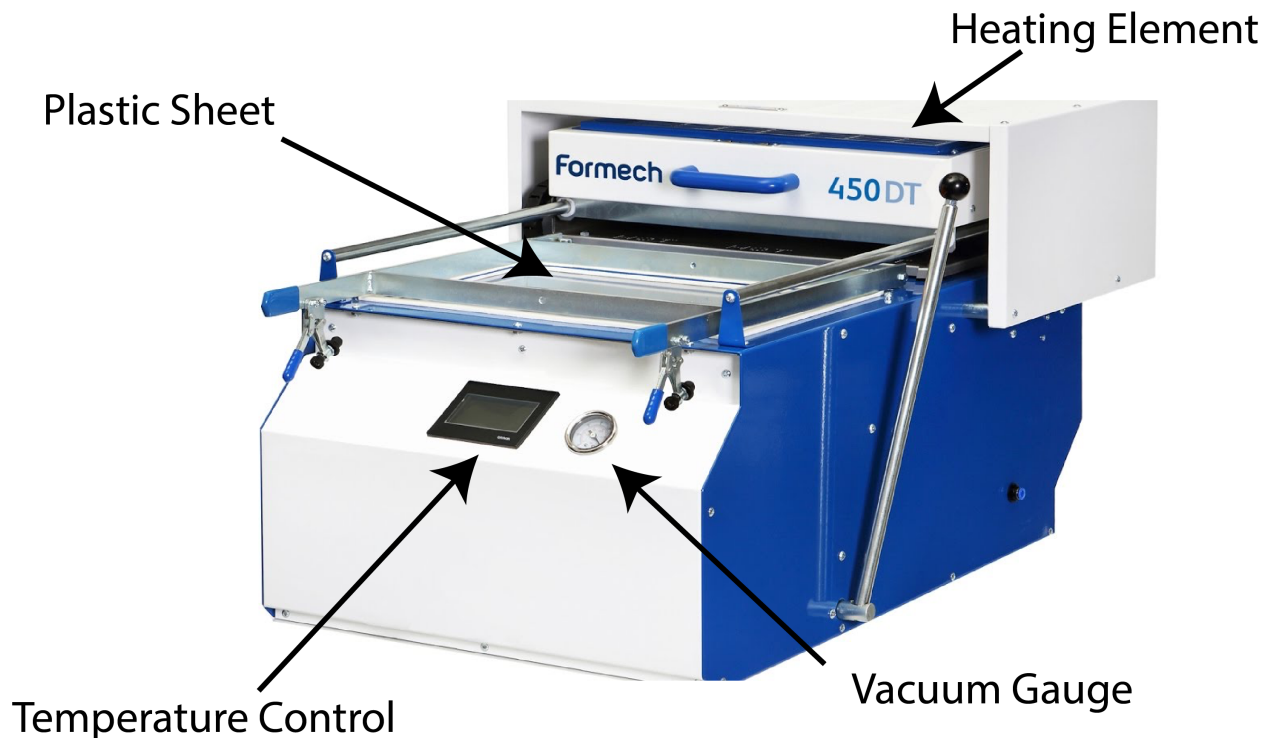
Formech 450DT benchtop vacuum forming machine. Image provided by Formech.
